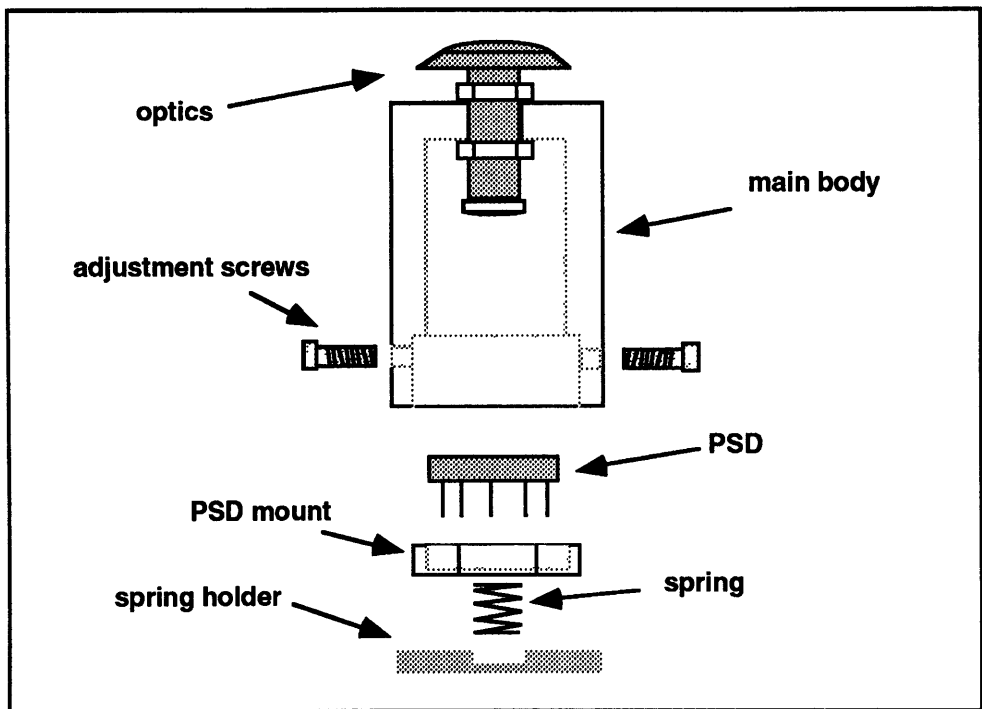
Prototype sun sensor for MITy-2: exploded view.
